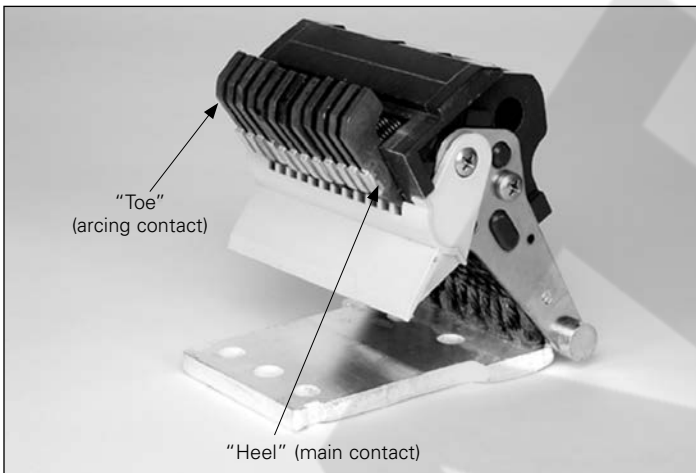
Standard frame DS (12-finger) moving conductor assembly
